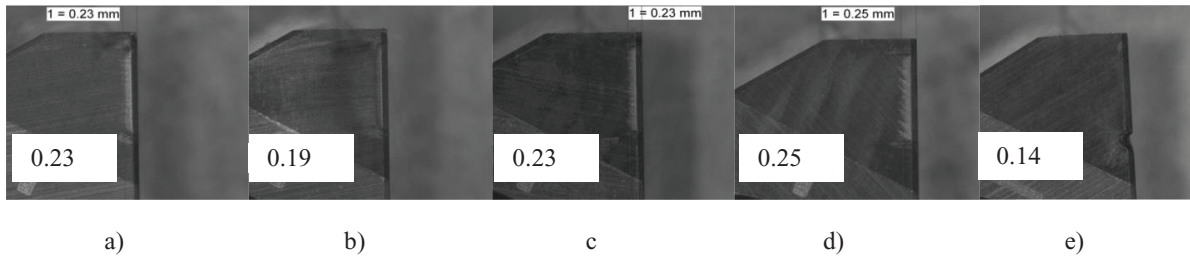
Tool wear of the tool after machining a) QH-H1 alloy, b) QH-H2, c) QL-H1, d) QL-H2 and e) TH
